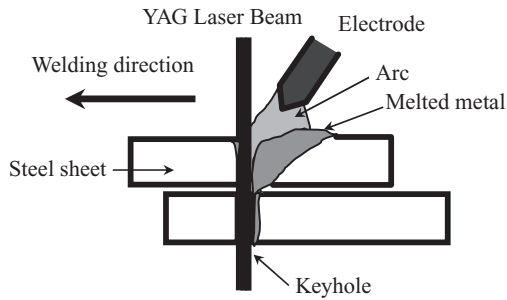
Configuration of laser beam and MAG arc electrode in laser arc hybrid welding
